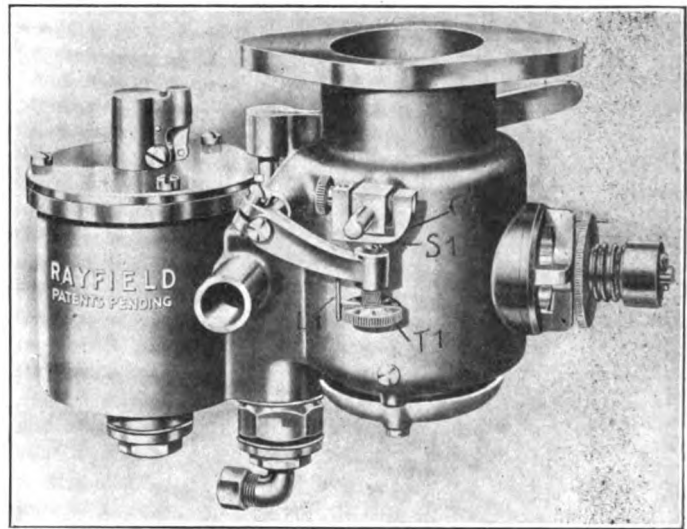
Exterior view of the Rayfield Carbureter showing the method of adjusting to obtain the best result
